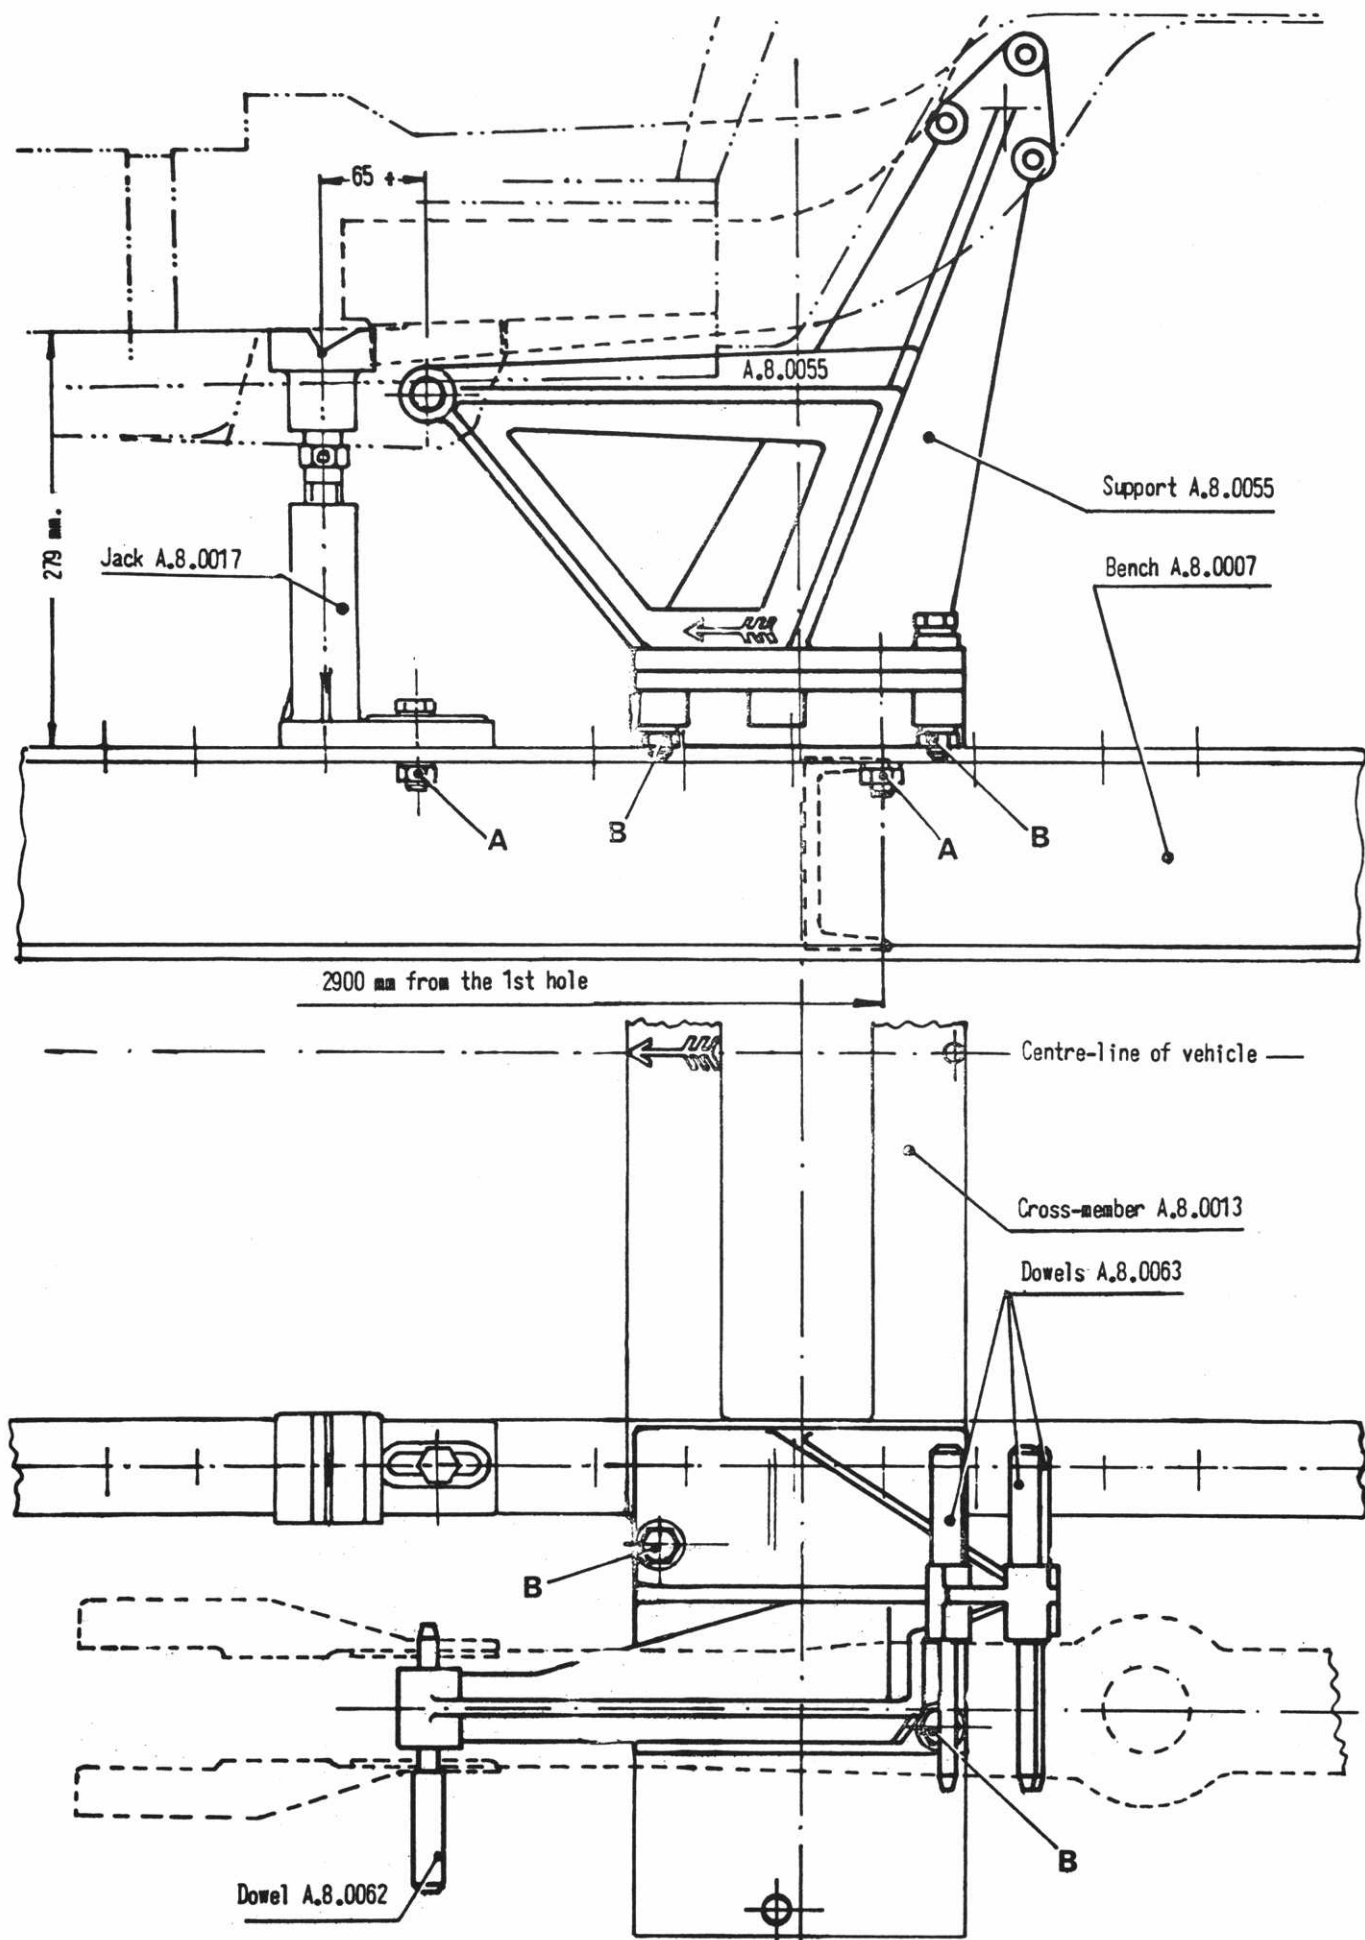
CHECKING THE LEFT-HAND REAR SUSPENSION
